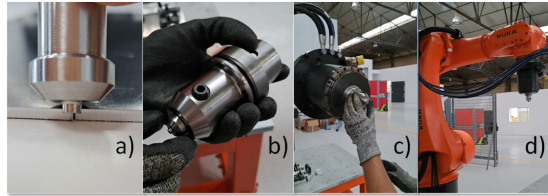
Robotic FSW lab at Cetemet. a) The machined IN718 tool, b) the tool inserted in the holder, c) the tool holder with the spindle and d) the Robot positioned for FW.
